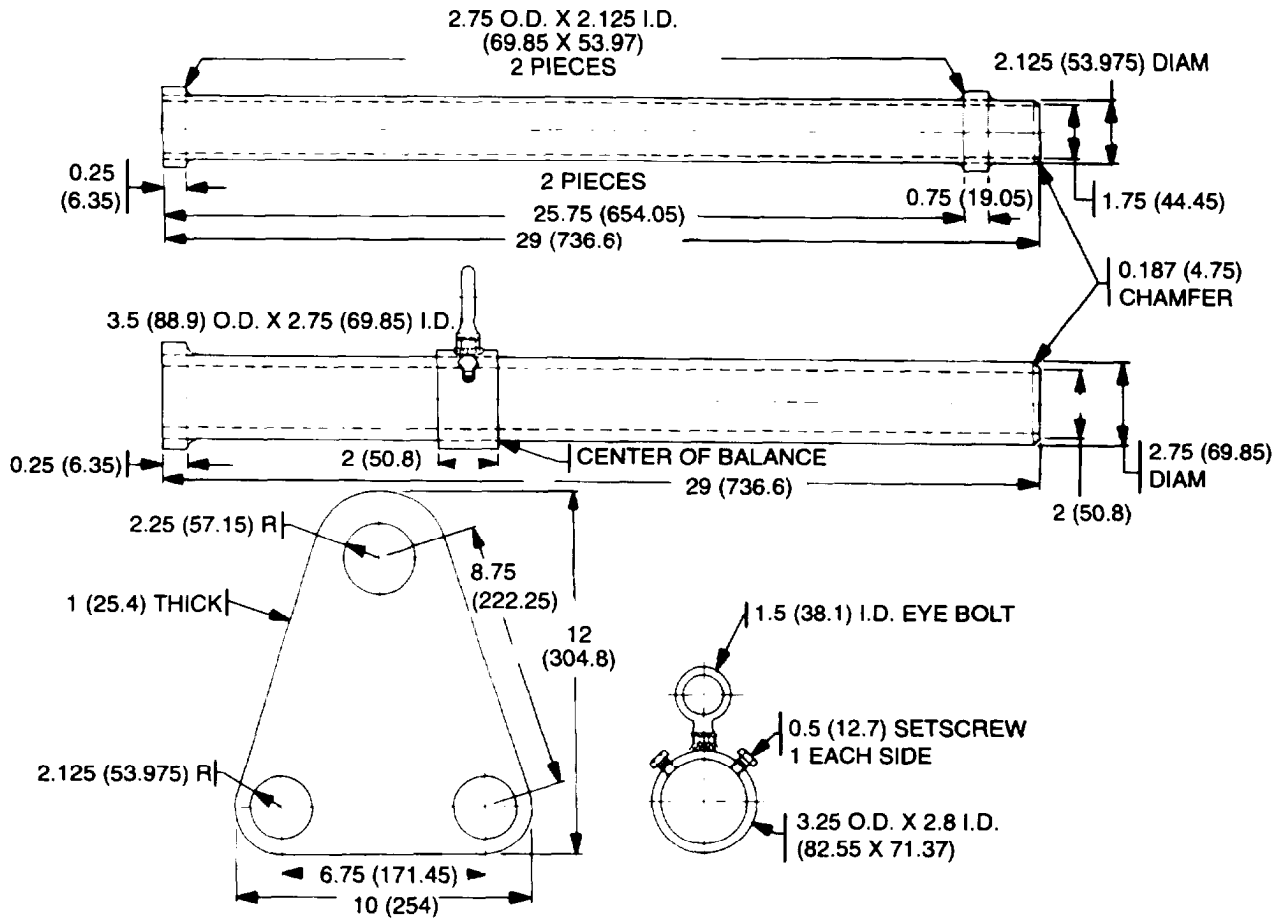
Ammunition Rack Removal and Lifting Tool (Sheet 1 of 2)
